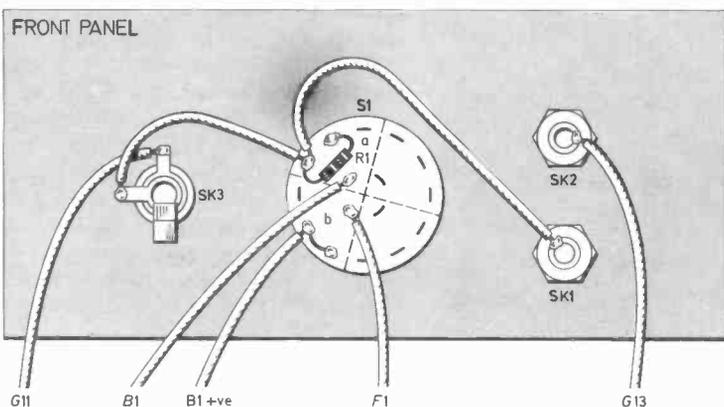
Layout of components on the rear of the front panel and interwiring details to the circuit board.
